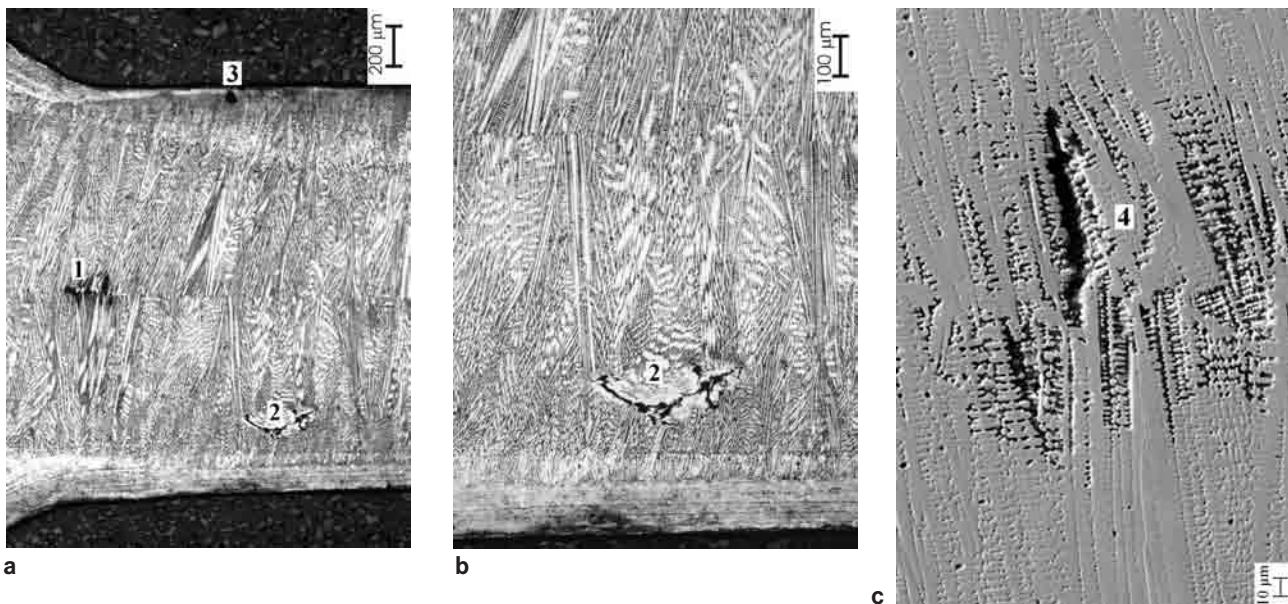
RSW welding spot between TWIP steel sheets. Details of the Fig. 7 section. Defective region (1), crack (2), porosity (3), shrinkage cavity (4). Light (a,b) and electron (c) microscope.
